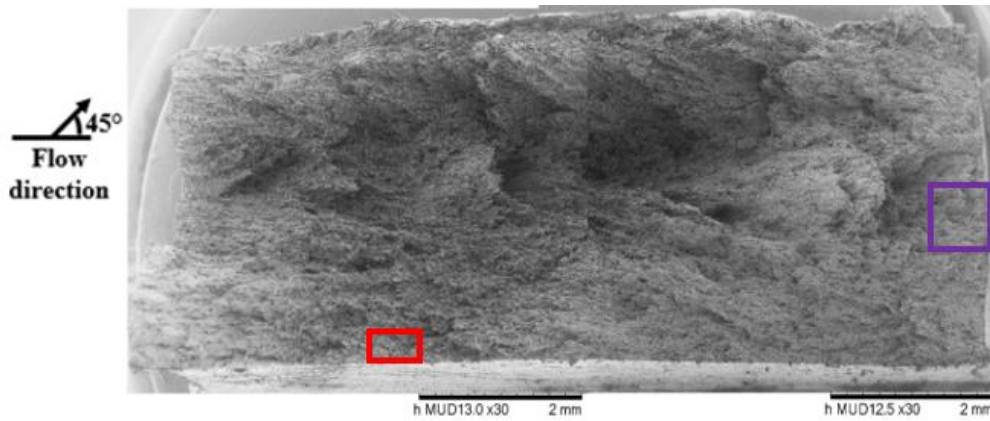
Fracture surface of a fatigue 45° specimen at 100° C
